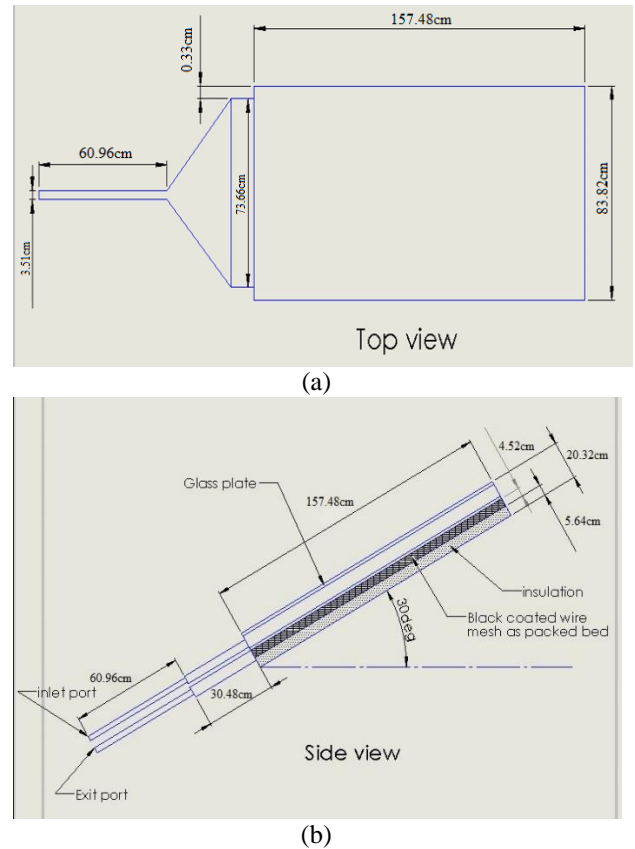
Sketch drawing of double pass solar air heater (a) top view; (b) side view.
